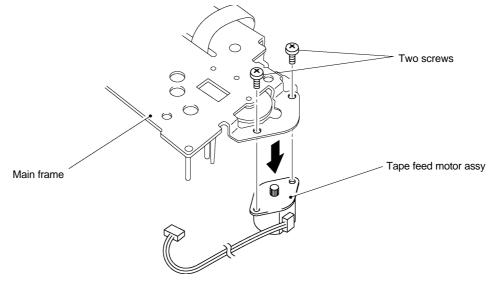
Removing the Tape Feed Motor Assy
